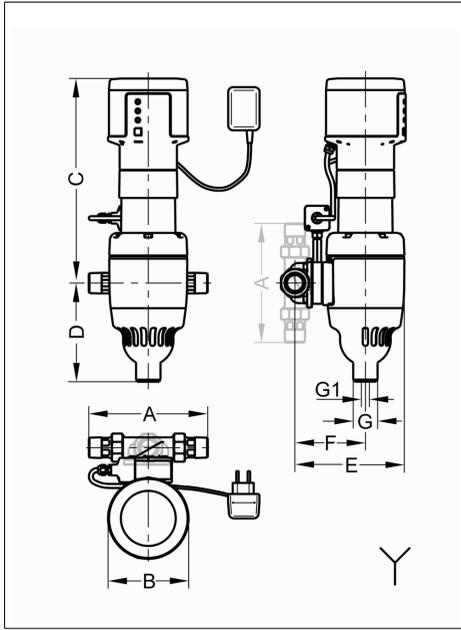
Installation dimensions JPF-A $\frac{3}{4}$ " - 2"
